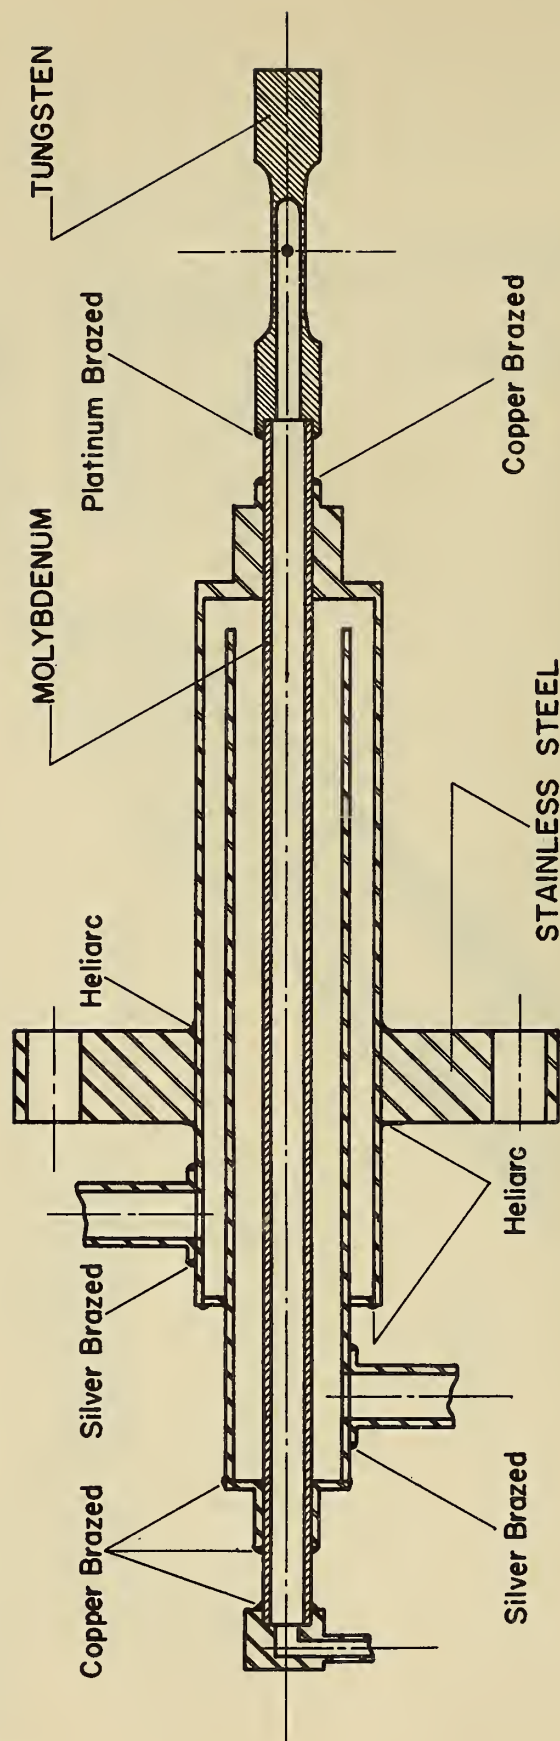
Mounting of tungsten tube with hydrogen inlet system.
